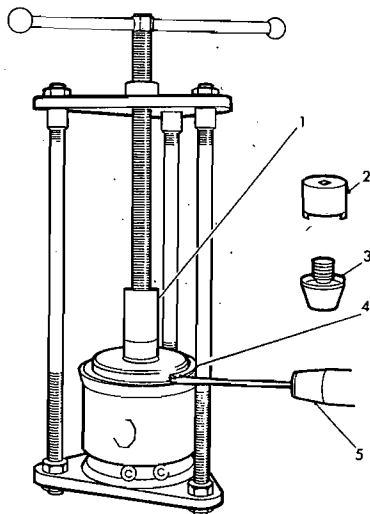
TYPICAL SPRING BRAKE ACTUATOR HELD IN BASIC TOOL MS61 SHOWING CIRCLIP REMOVAL
